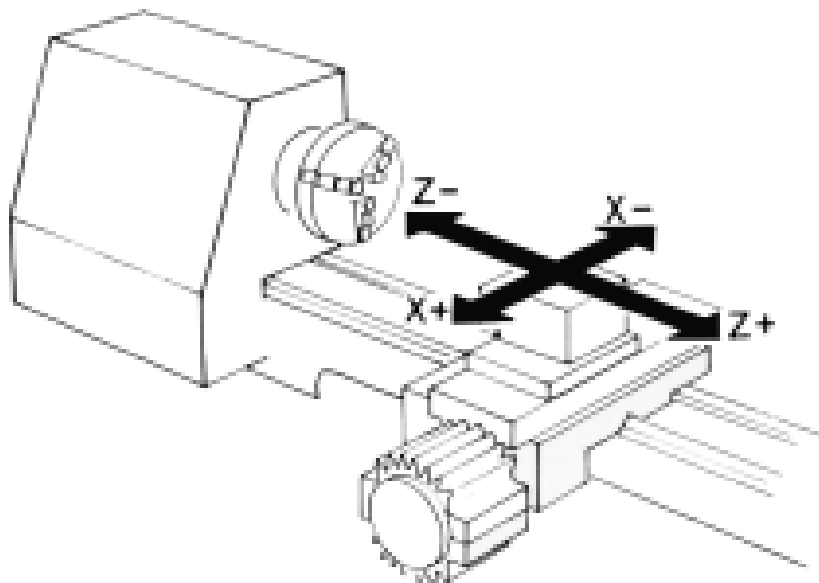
The main axes of a lathe or turning center. (Emco Maier Corp)
